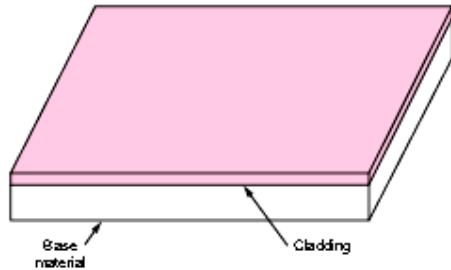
Welds into the clad require matching filler materials. Welds into the heavier base material require filler materials for strength, ductility, and other mechanical properties.
